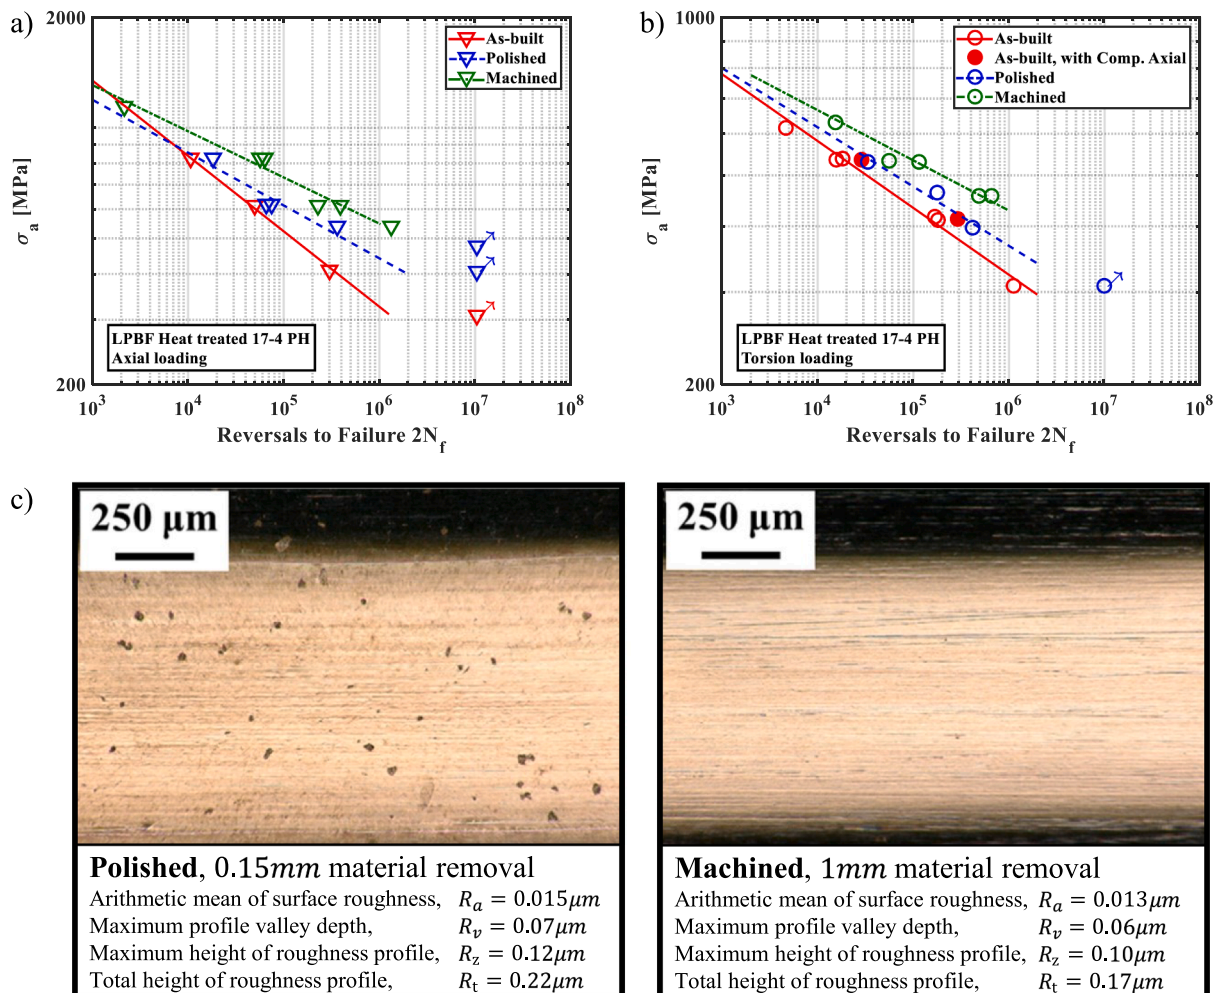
Fatigue data for LPBF CA-H1025 heat-treated 17-4 PH specimens in as-built state and machined or polished to a similar surface roughness under a) axial and b) torsional loading; c) polished (left) and machined (right) surfaces of LPBF specimens. Figure adapted from [153].
